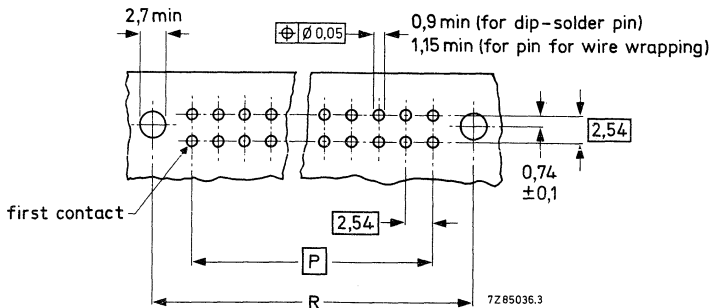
Hole pattern for male headers with 90°-angled dip-solder pins or 90°-angled pins for wire wrapping; for dimensions P and R see Table 7. Fixing of the male headers can be done by means of M2,5 screws and nuts.
